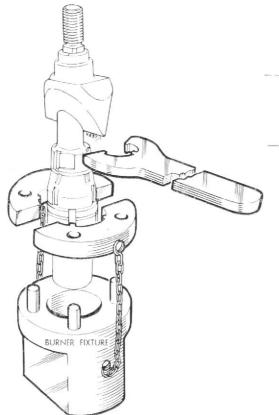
Removing burner from holder, using fixture T.77086 and a 'C' spanner.
